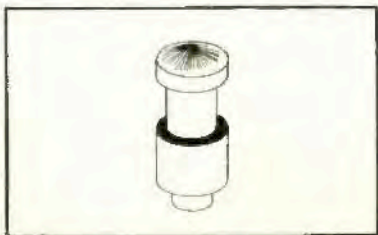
Guidepost used in conjunction with "outboard" head mounting.
